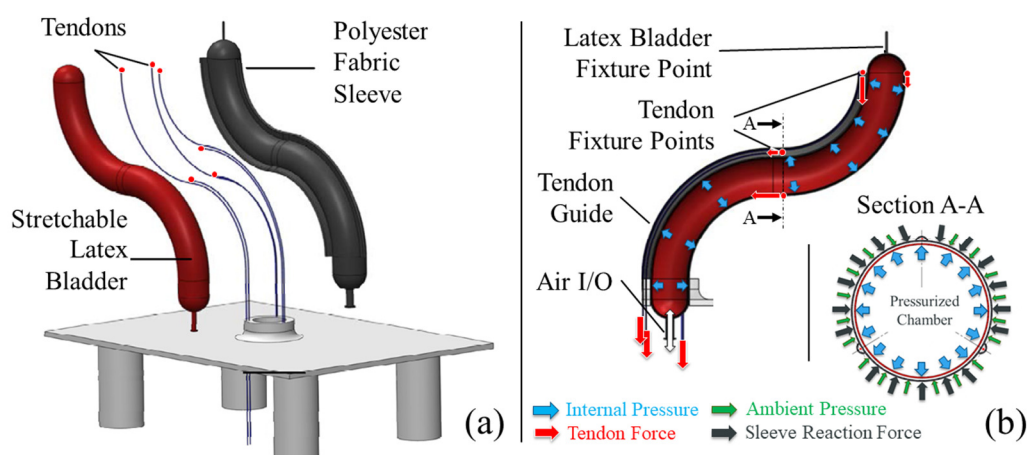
CAD drawings of the first prototype of the Inflatable Arm: (a) Exploded view showing the arm components and (b) section view showing the tendon routing and their fixture points, the force distribution due to the pressurized air, the reaction force of the sleeve and the tendon pulling force.
